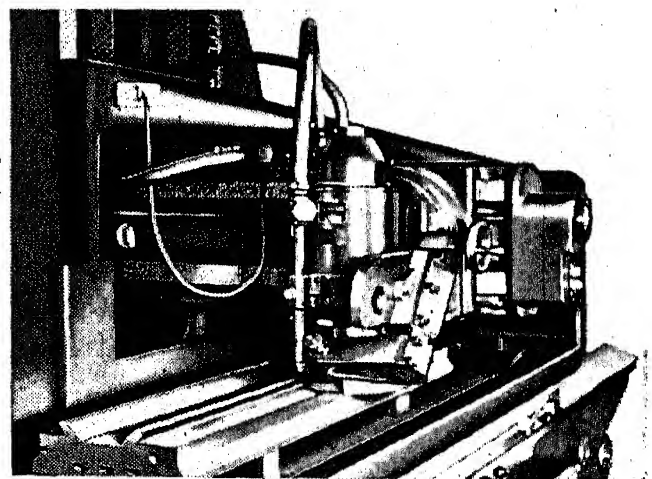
A vertical spindle way grinder grinding the dovetail way of a milling machine table. (Courtesy Mattison Machine Works.)
